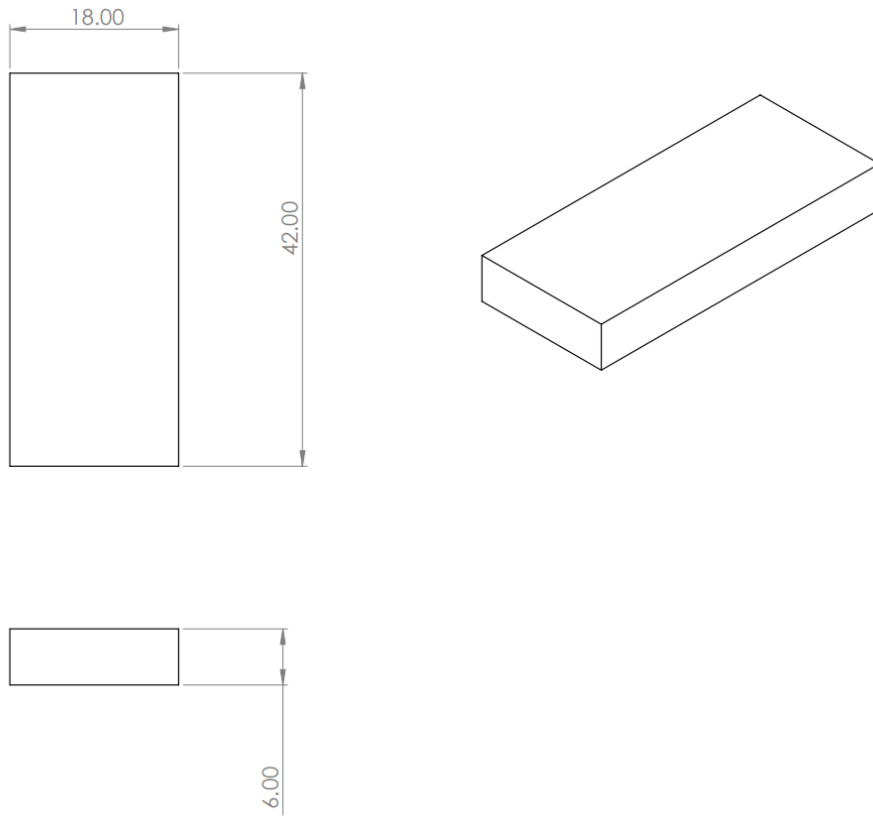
Dimension of AAB Casing (Bottom) in mm
